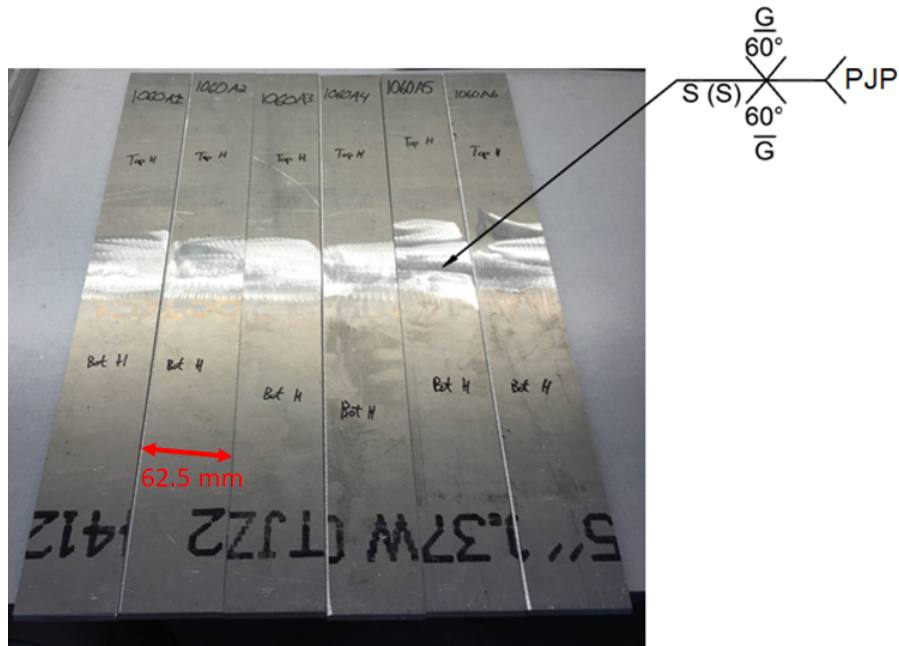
Samples with weld symbol detailing the PJP groove welds. S is the parameter representing the required effective throat and the groove depth, which were taken as equal.
